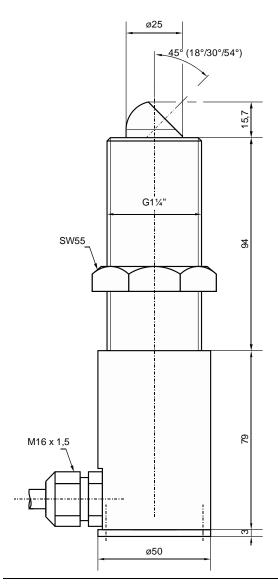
Dimensioned drawing screw-in sensor Type NOS-V2E
